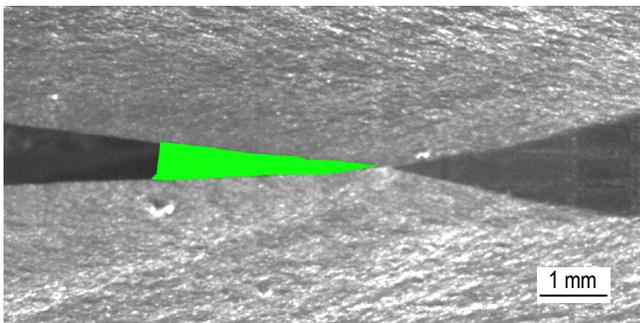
Image showing how the CTOA was determined for these weld specimens.
